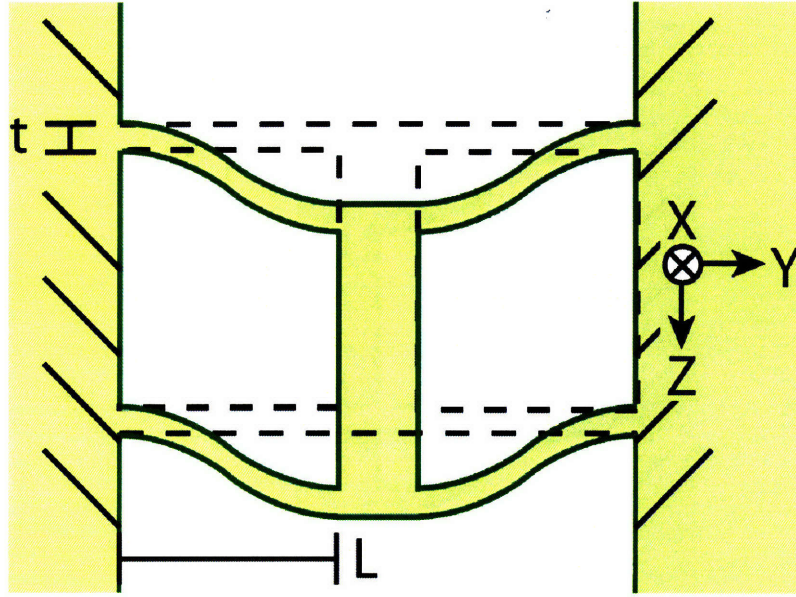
Flexure susceptible to the effects of machining tolerances.
